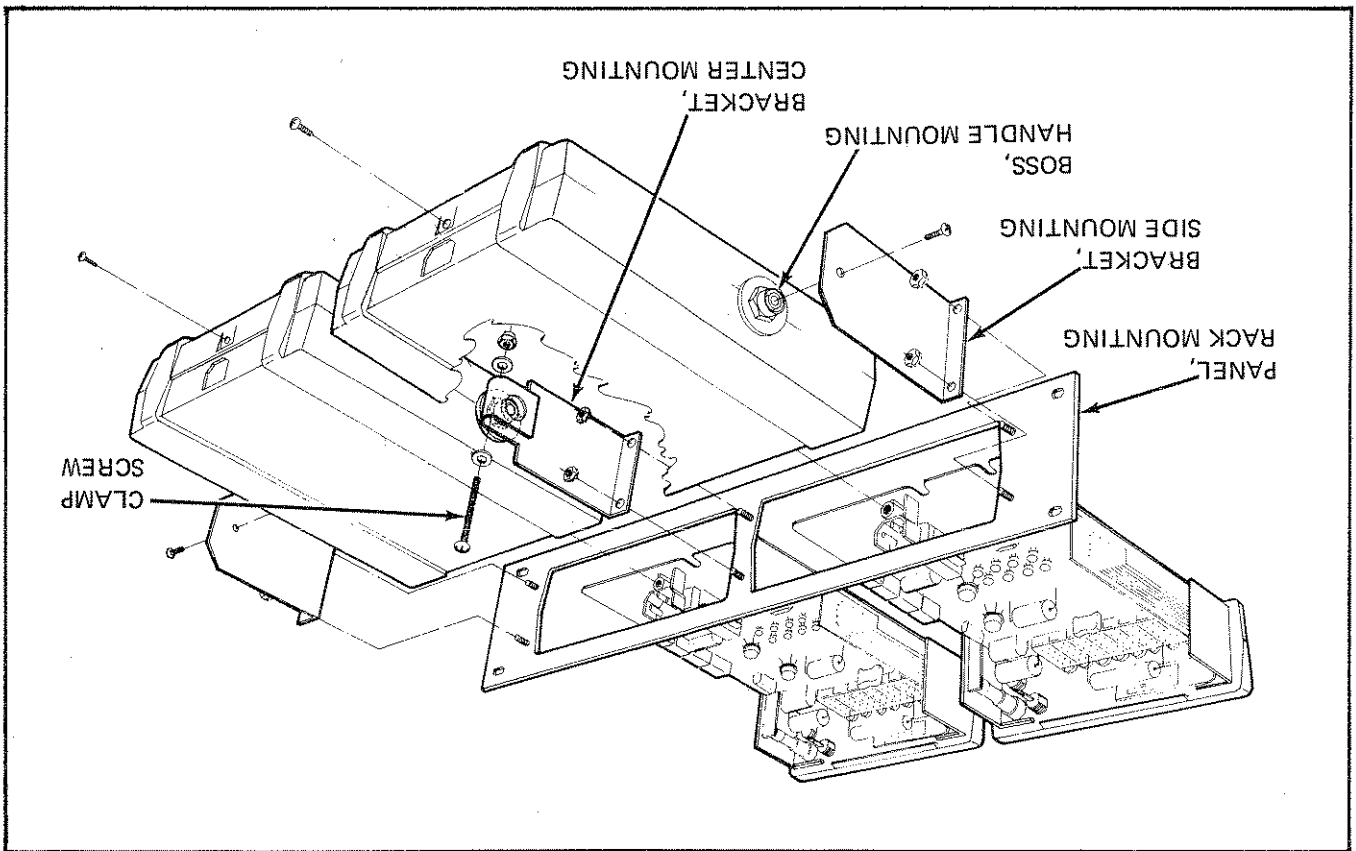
RACK MOUNTING KIT, SIDE-BY-SIDE MOUNTING
